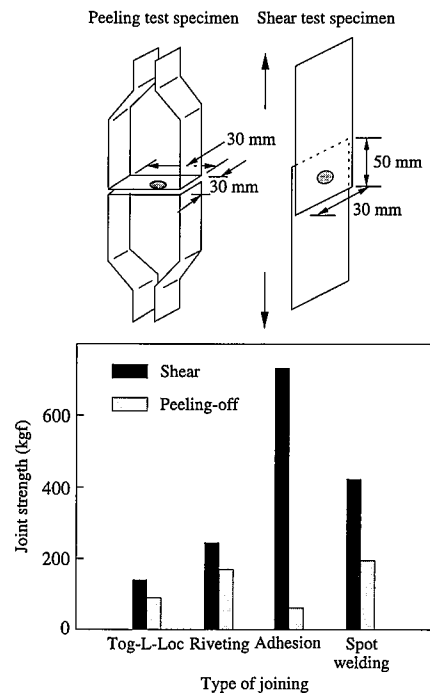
Type of joining and strength (All the sheets are 0.8 mm thick, Spot welding: hot dip galvanized sheet + hot dip galvanized sheet, Others: pre-coated sheet + pre-coated sheet)
